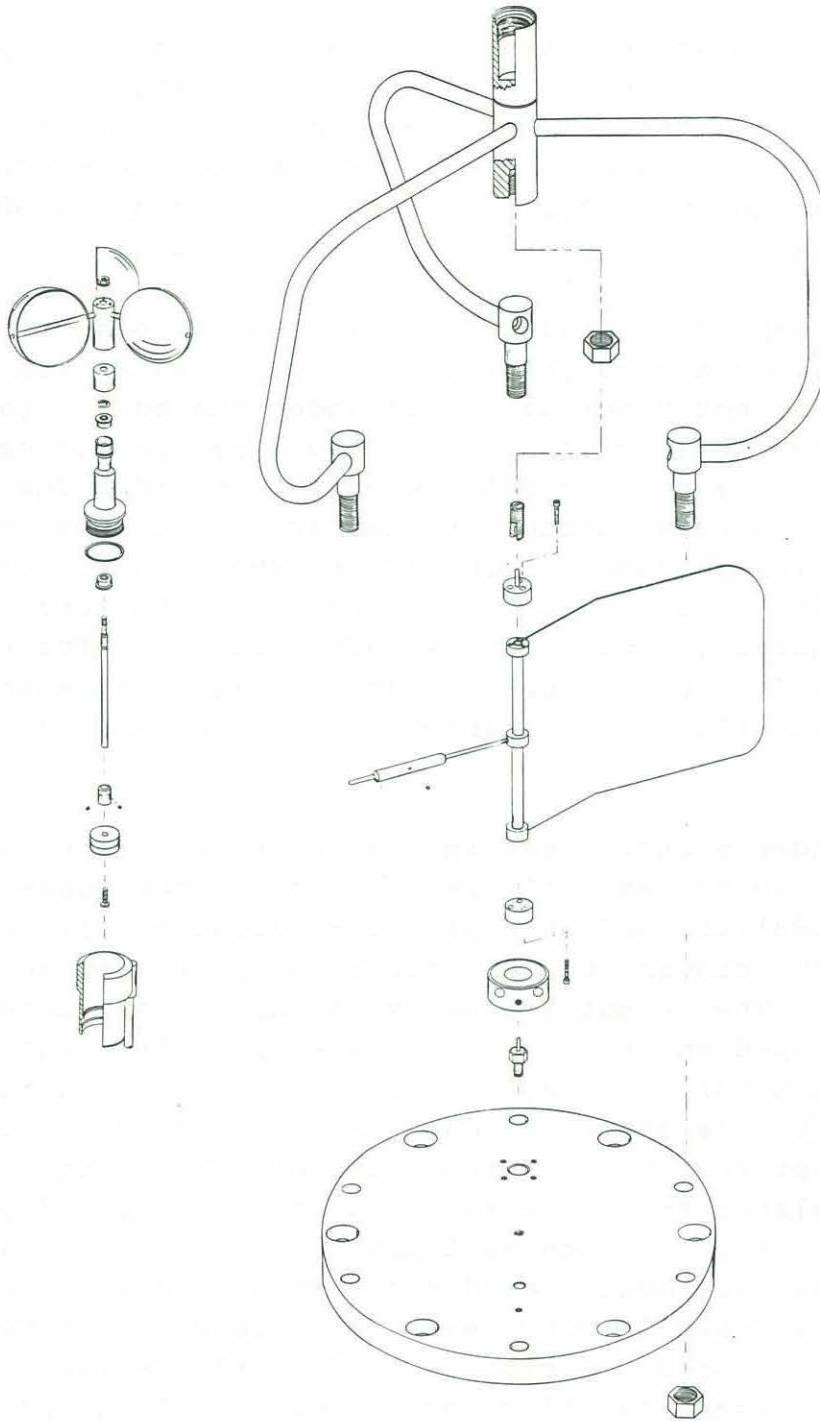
Exploded view of the Integral VAWR sensor set. ,
